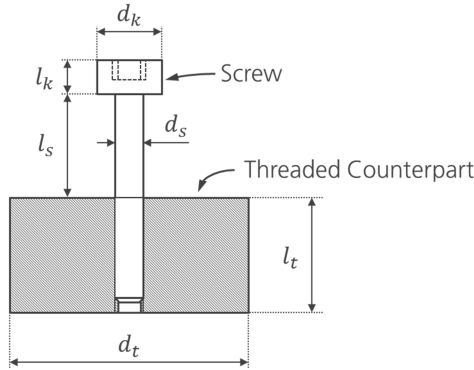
Model of a screw connector element consisting of a screw type ISO 4762 and a cylindrical threaded counterpart.
